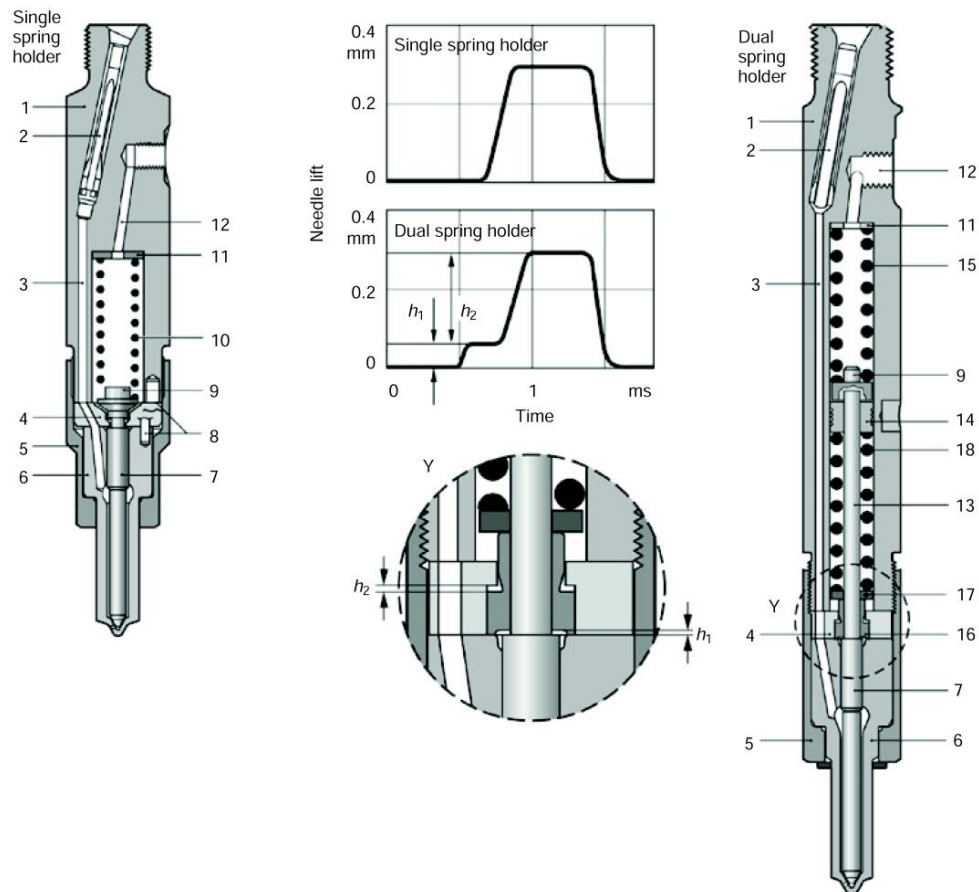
Nozzle holder assembly. 1 Injector body; 2 Edge filter; 3 High pressure inlet; 4 Intermediate disk; 5 Nozzle retaining nut; 6 Nozzle body; 7 Nozzle needle; 8 Locating pin; 9 Push rod; 10 Compression spring; 11 Shim; 12 Fuel return; 13 Pressure pin; 14 Guide disk, 15 Compression spring 1; 16 Stroke adjustment sleeve; 17 Spring shim; 18 Compression spring 2. [34]
